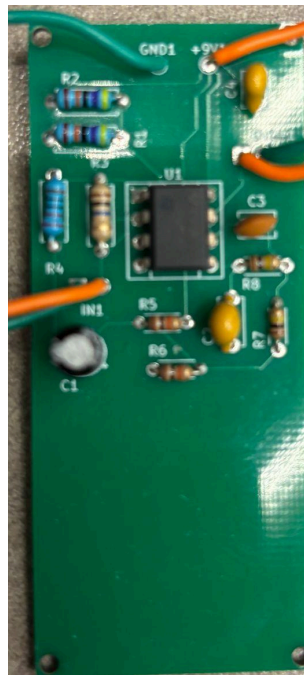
PCB layout                Figure 8: Completed PCB for guitar chamber
